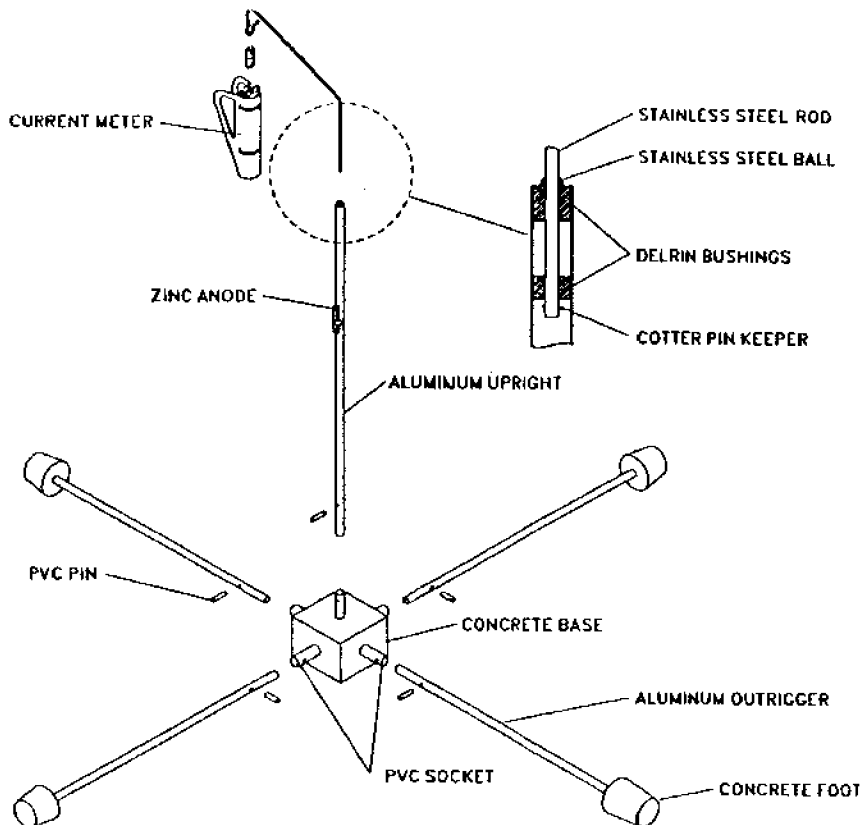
Exploded view of mooring design. Magnification of swivel assembly is shown at upper right.
